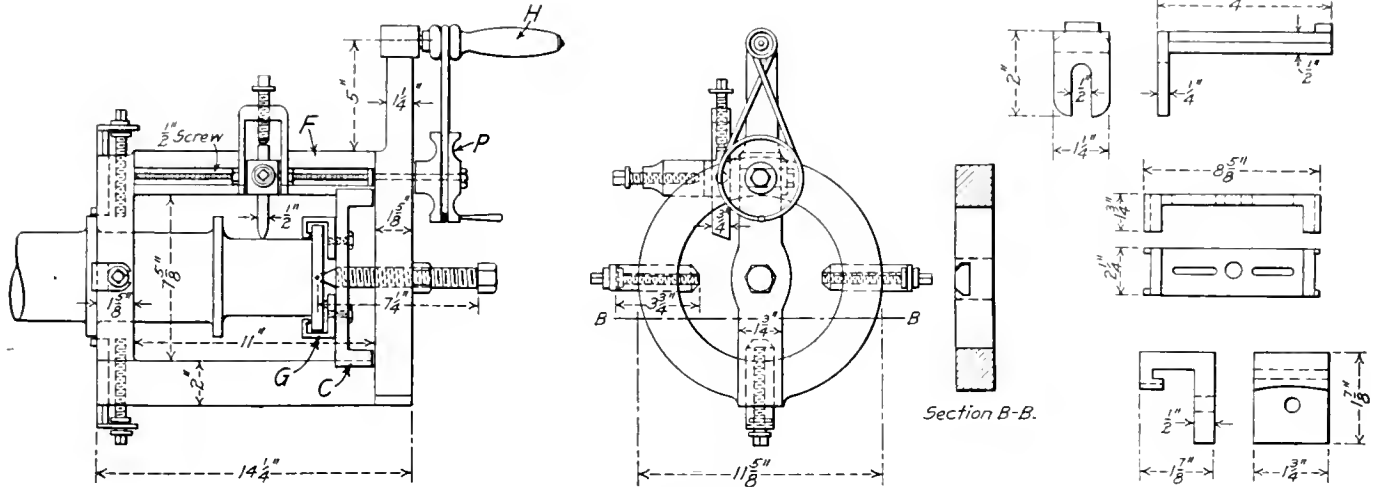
Hand Driven Machine for Truing Crank Pins.
